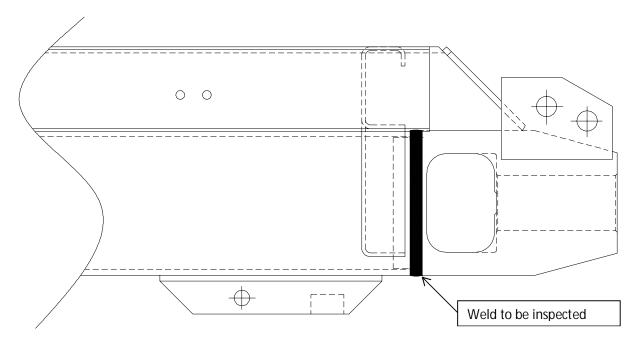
Typical weld location of block connected to chassis with overlapping profile
